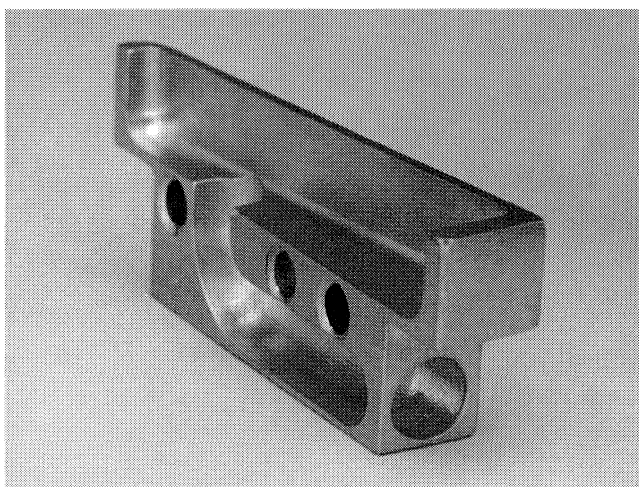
Controlled Inlet Showing Hot Oil Director Wiper and Cool Oil Pocket.
